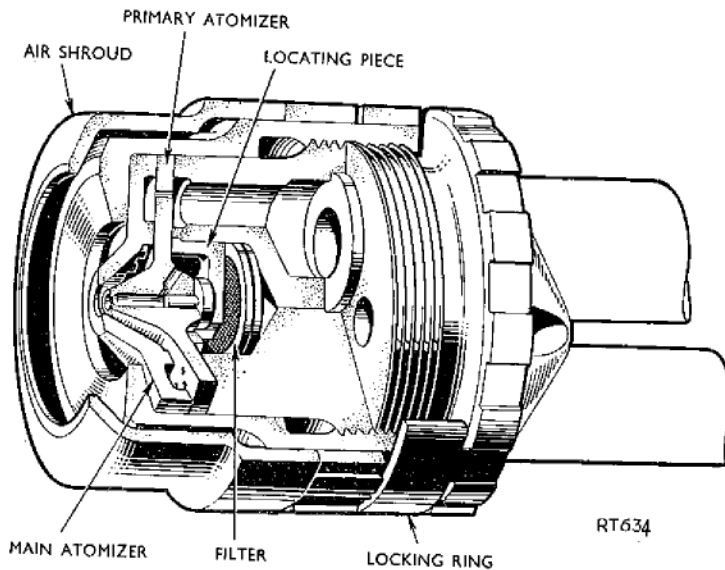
Sectioned view of burner head (Derwent and Nene)
